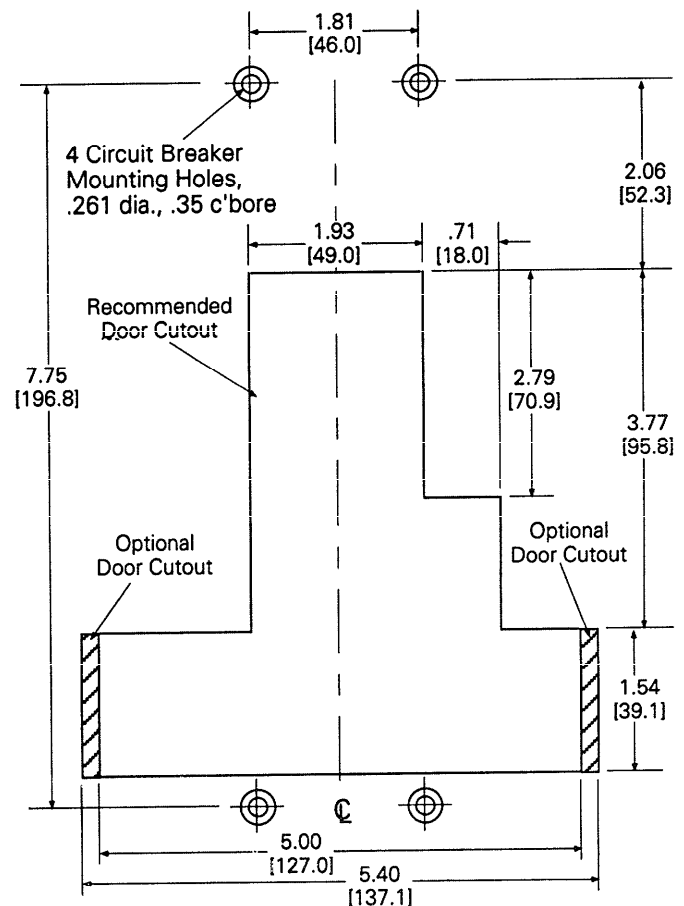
Mounting hole and escutcheon cutout pattern (in/[mm]).
